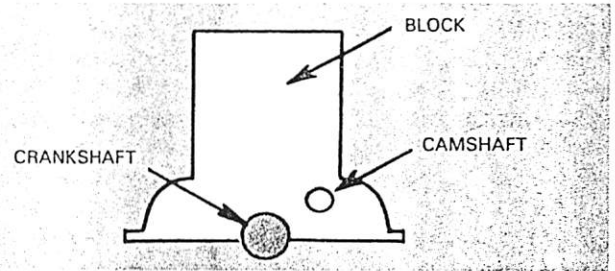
One location for camshaft in an in-line engine. See Fig. 2-72 for cam location in an overhead camshaft, in-line engine.
